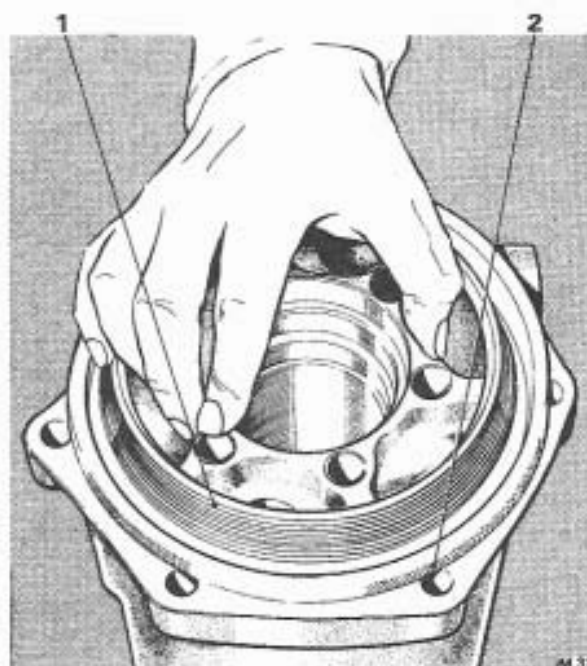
FITTING THE REVERSE CLUTCH PISTON
